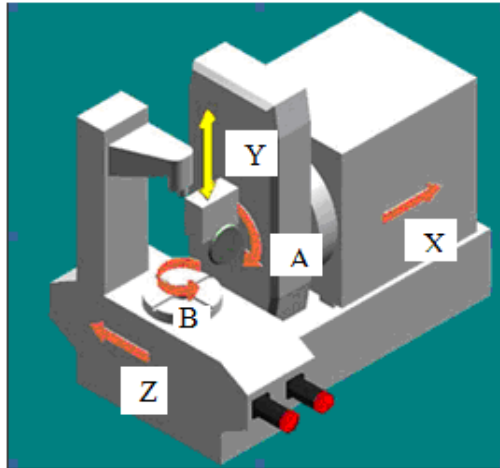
The orientation of the coordinate axes of the CNC gear grinding machine
